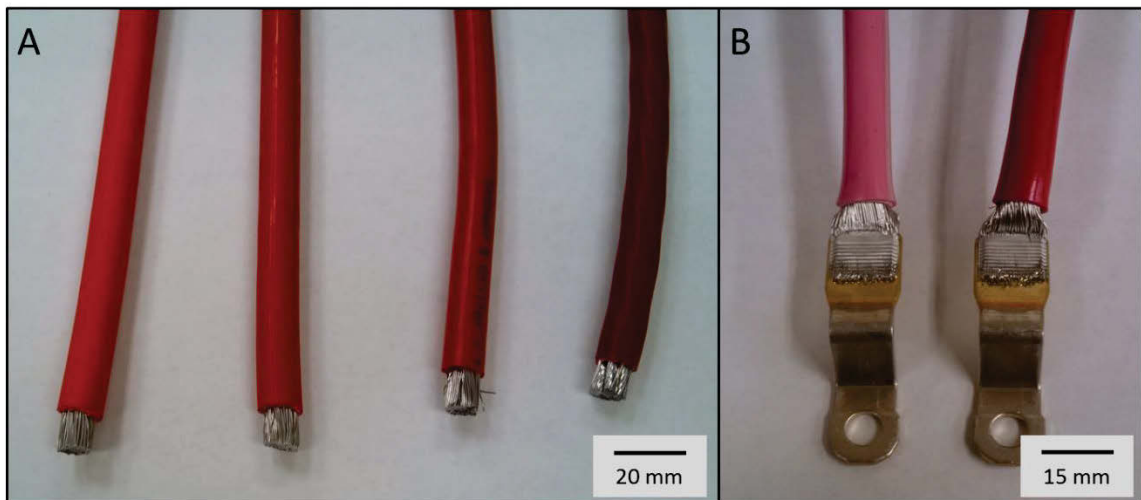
(A) Four of the six unwelded aluminum cable samples. (B) One of the sets of ultrasonic welded samples. Based on the shear test, the left weld (pink insulation) was considered a 'fail' while the right weld (red insulation) was considered a 'pass'.
